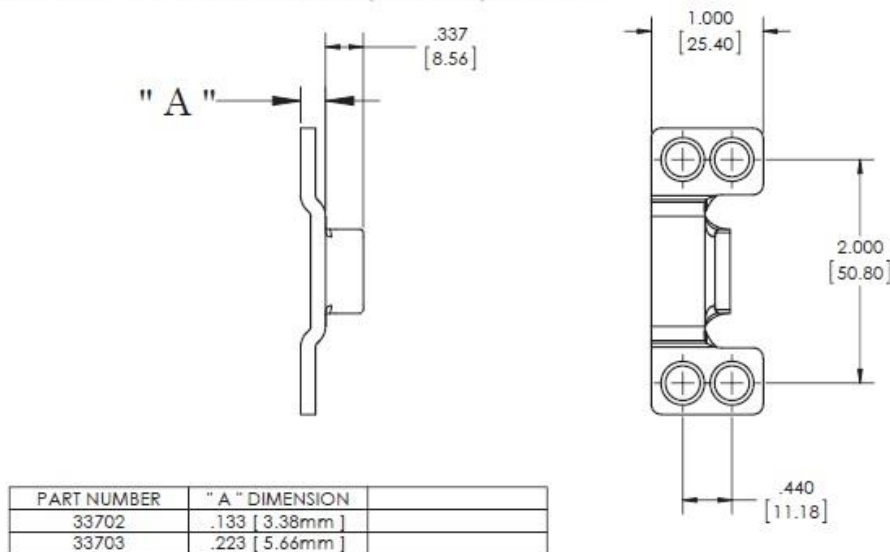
NON HANDED ADJUSTABLE KEEPER
